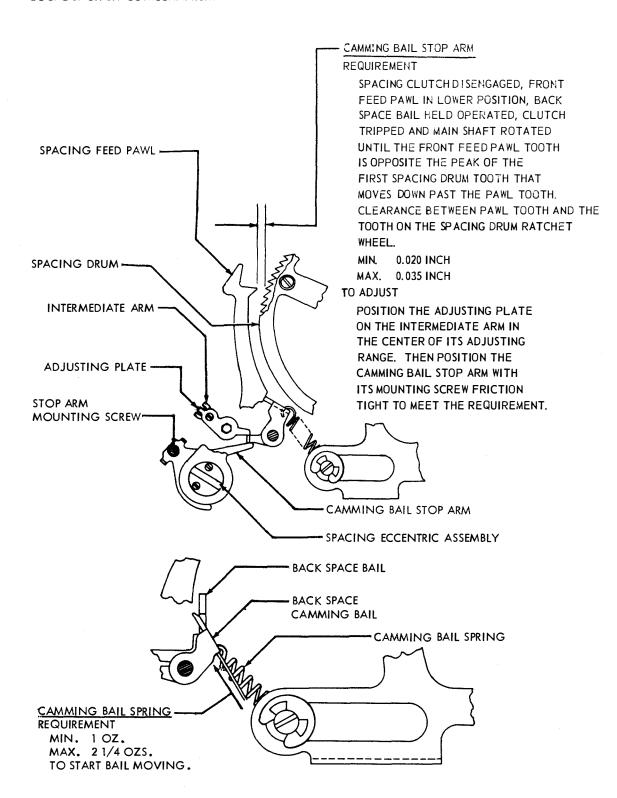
TYPING UNIT, BACK SPACE MECHANISM
